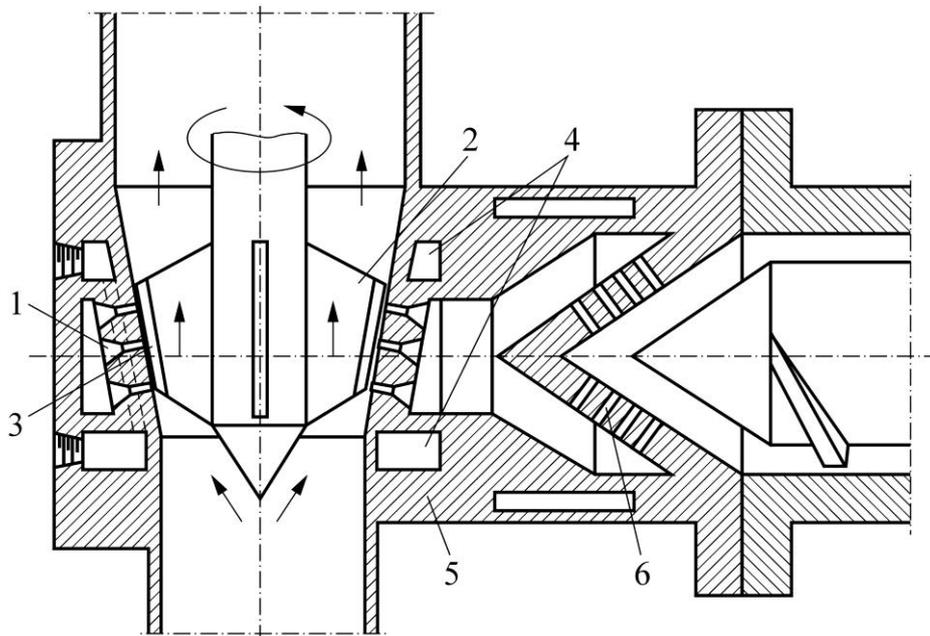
Pelletizer rotor with cutting blades (Kreyenborg Granuliertchnik, Germany)
